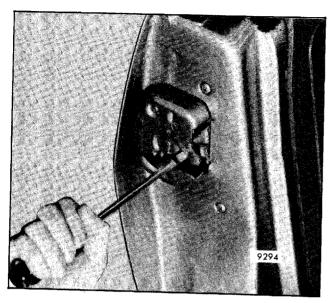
Manually Latch Upper Right Lock - Upper Lock Shown, Lower Lock Same
